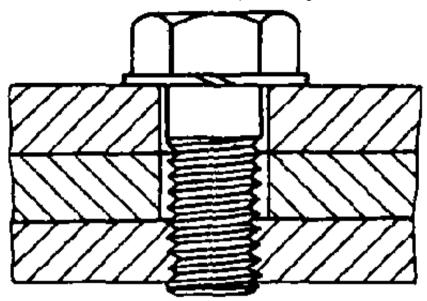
Joint made with a bolt and a component part, locked with a spring ring Sequence of operations:
